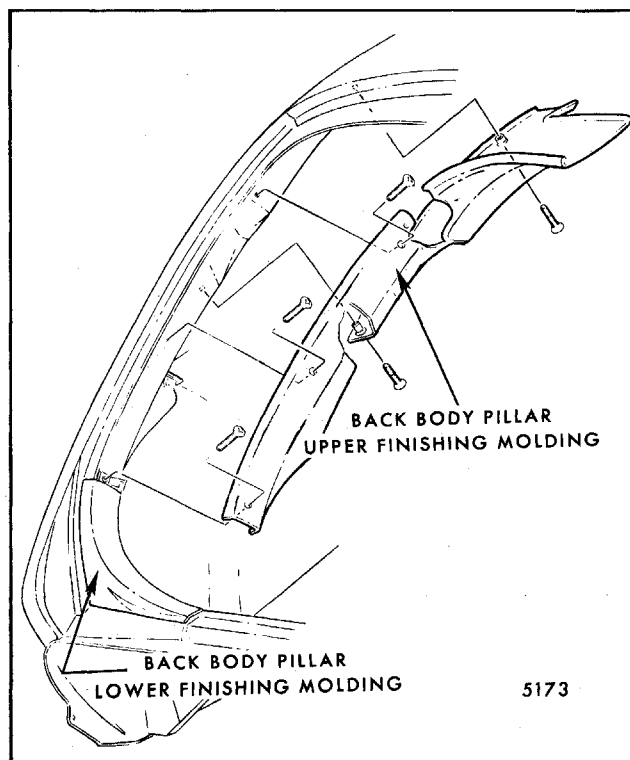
Back Body Pillar Upper Finishing Molding - Left Side Shown
